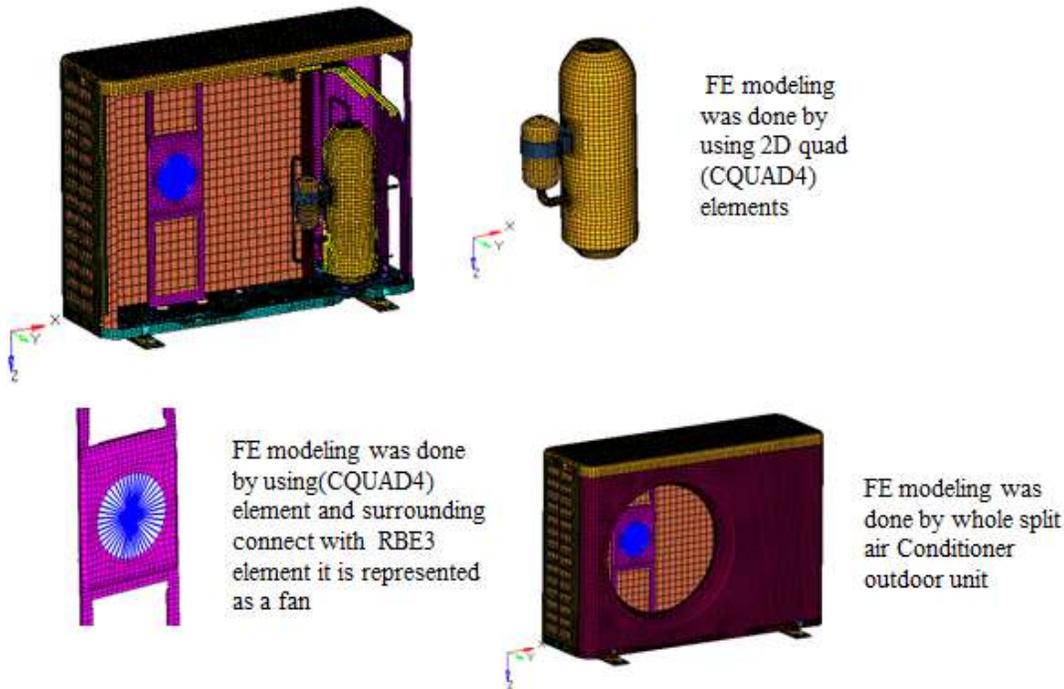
Finite element model of split unit air conditioner system outdoor unit
